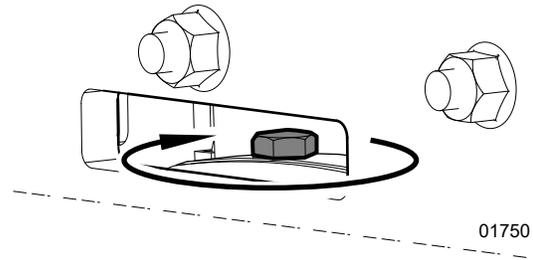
Turn Adjusting Screw Clockwise to Increase Chain Tension
